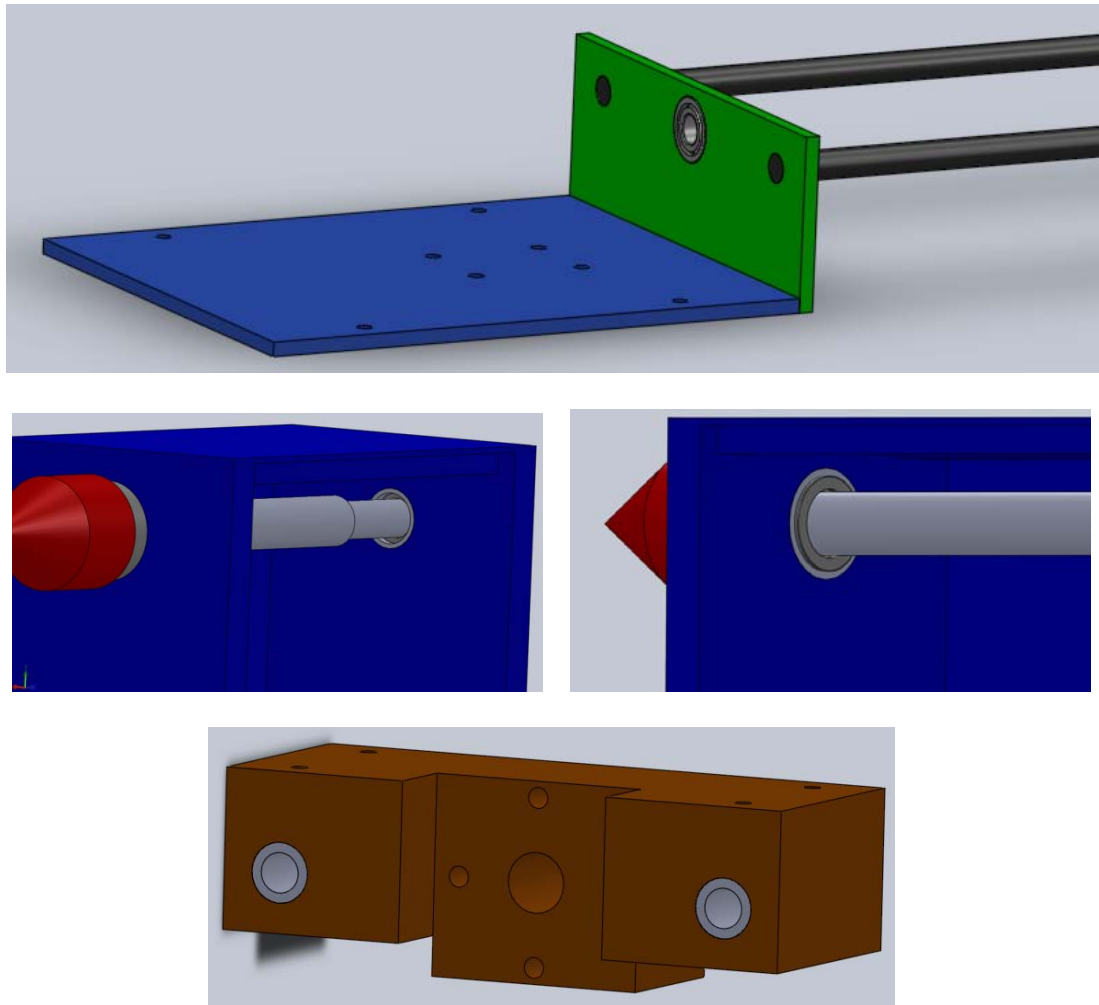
Top: Press-fits of the Slider Rods and Screw Bearing into the Camera Rod End Support, Middle: Press-fit of the 3/4" ID and 1" ID Shaft Bearing into Driven Stand, Bottom: Press-fit of Bushings into Camera Base.
